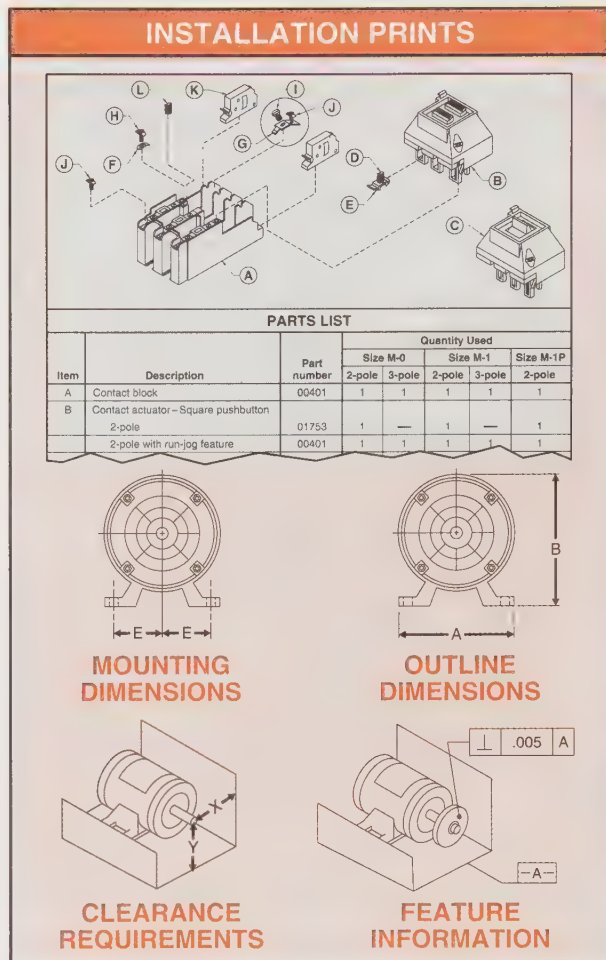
Installation prints give information required for a specific piece of equipment.
